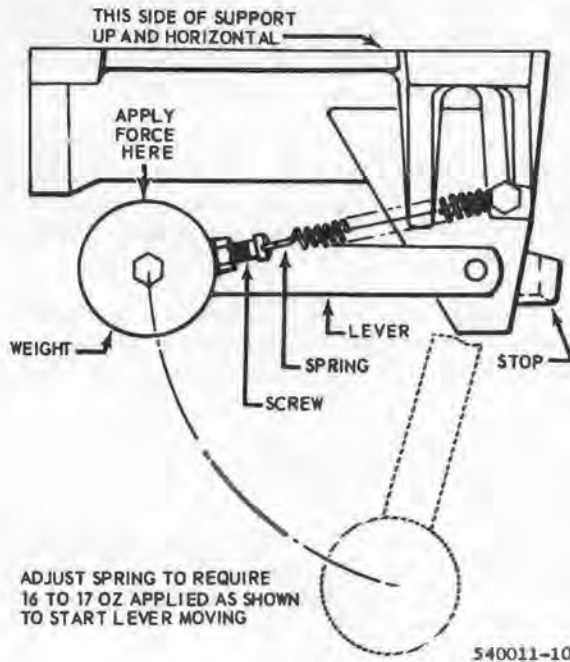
Checking spring tension on stop assembly (UH-1B Serial No. 64-14101 and subsequent)
